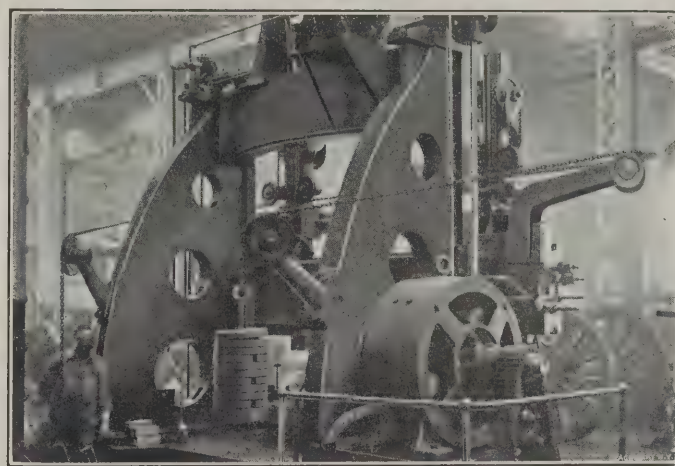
Niles 90-inch Boring Mill Driven by 20 H. P. Motor.
